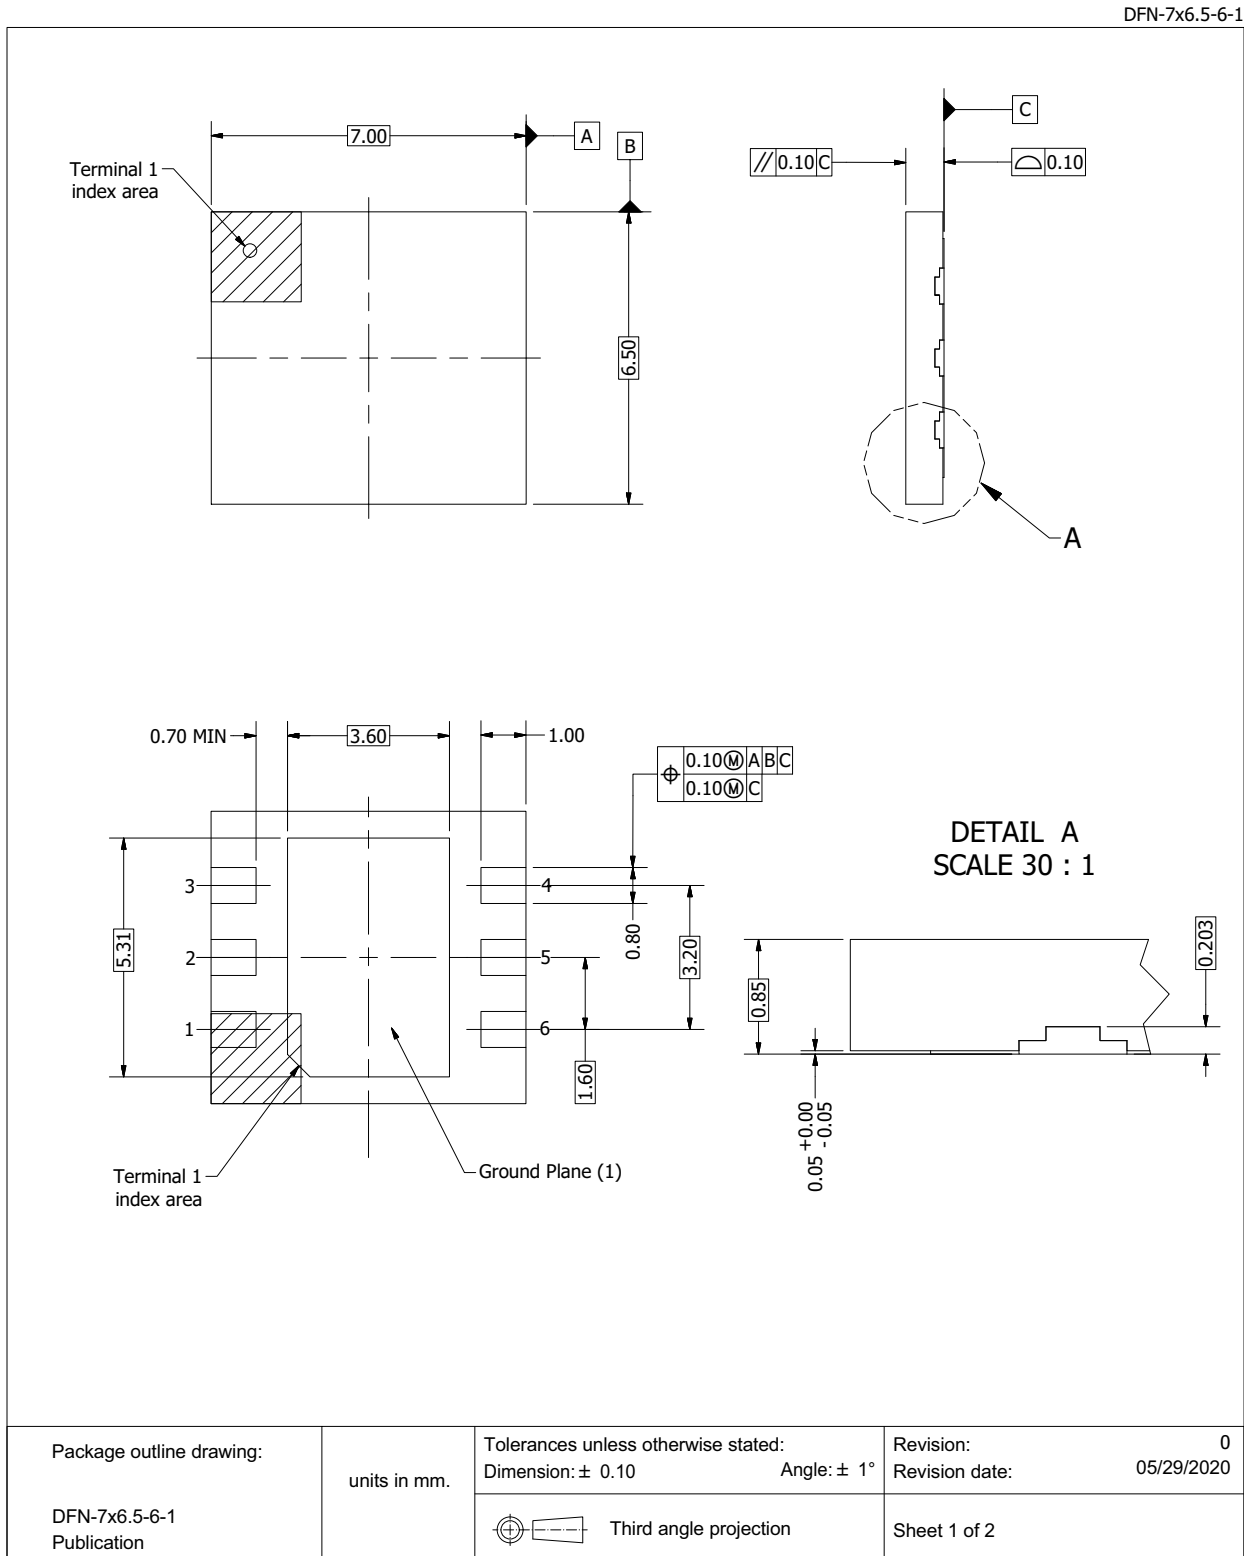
Package outline DFN-7x6.5-6-1 (sheet 1 of 2)
